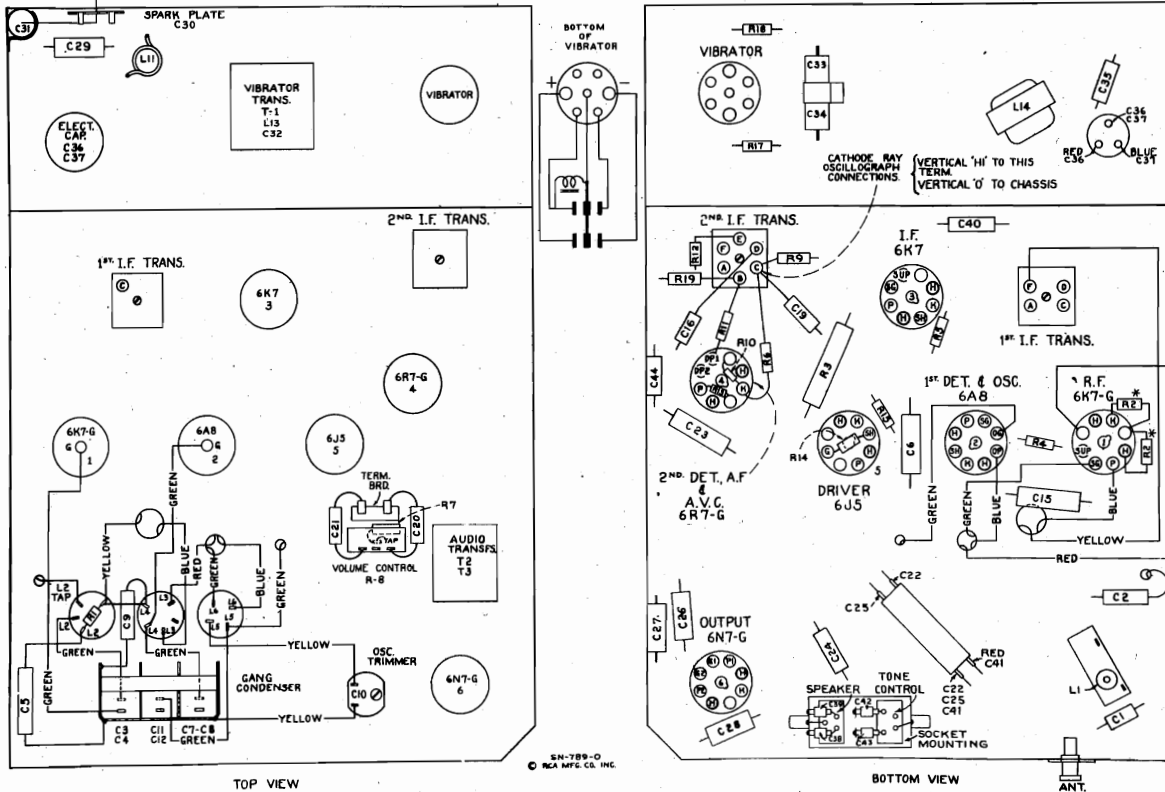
Component Parts Location and R-F Wiring Diagram (Model 8M4)
